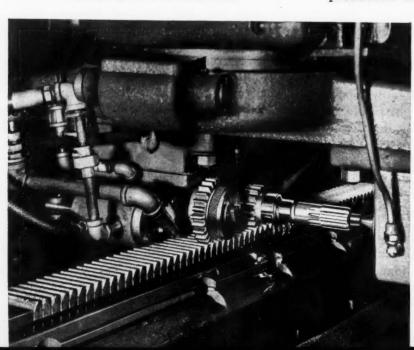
Tandem Shaving of the Seventeen-tooth Gear of a Countershaft Cluster and the Twentytwo-tooth Gear of a Reverse Idler on a Rack Type Machine
